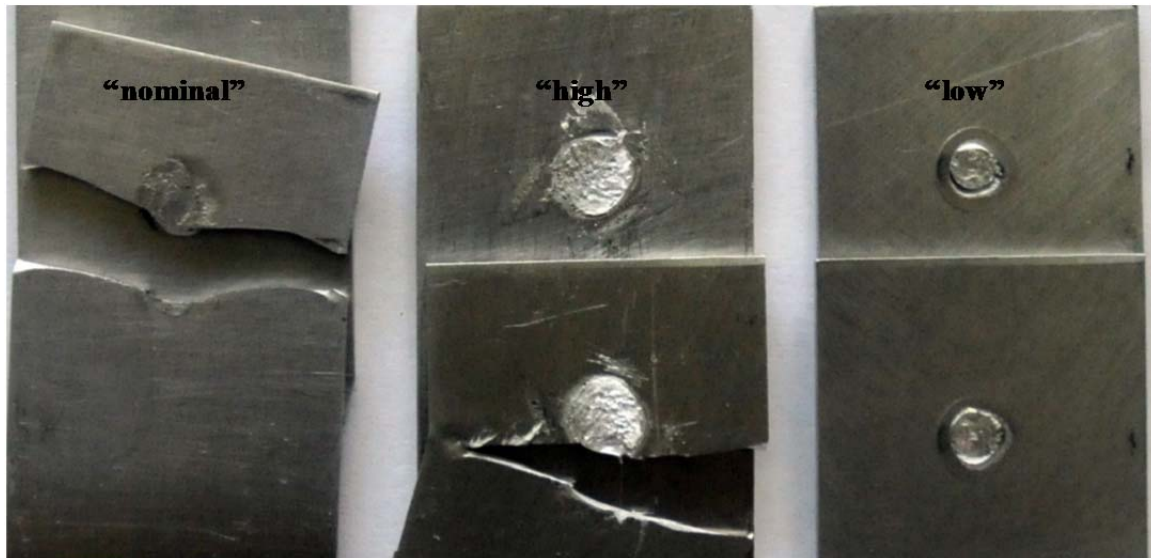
Fractured fatigue resistance spot welding specimens. These specimens were tested at one load ratio ($R=0.00$) and three welding conditions denoted as “nominal”, “low” and “high”.
